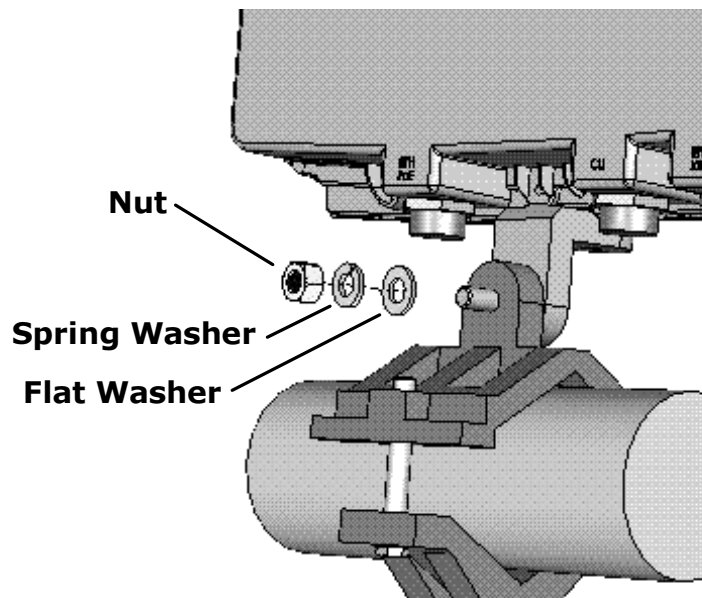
MBW 3100 Unit Horizontal Pole Mounting
